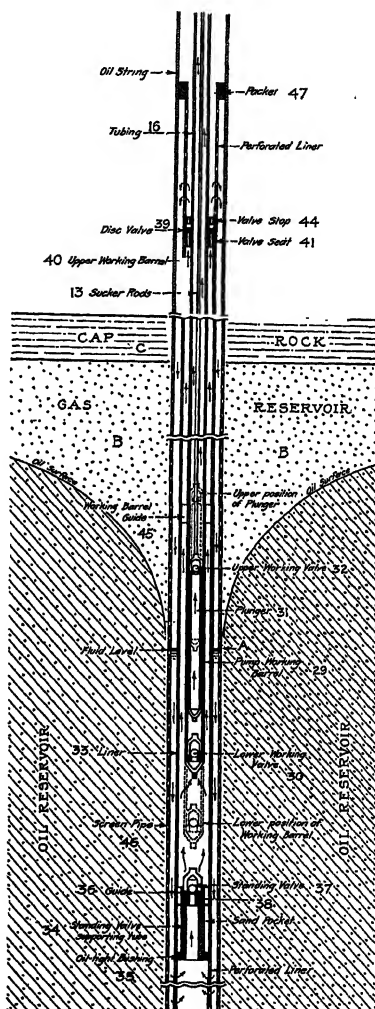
ASSEMBLY VIEW OF DOUBLE-ACTING OIL-WELL PLUNGER PUMP, ILLUSTRATING MANNER OF SEGREGATING GAS FROM OIL IN WELL.
